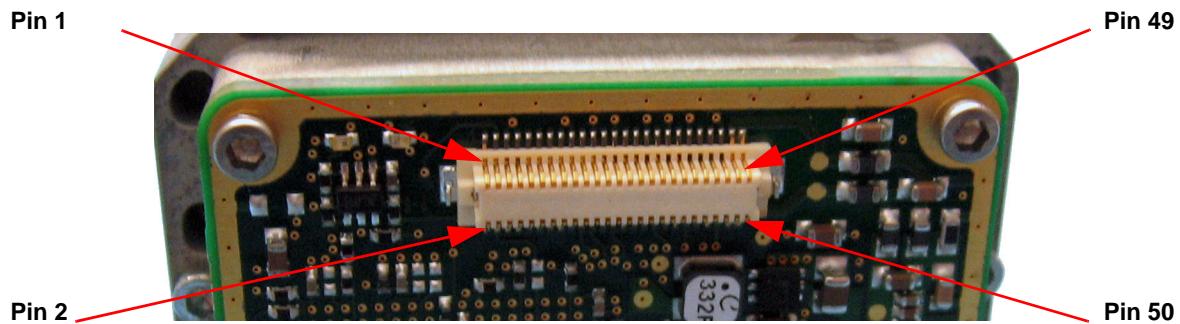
Mechanical Definition for 50-pin Interface Board
